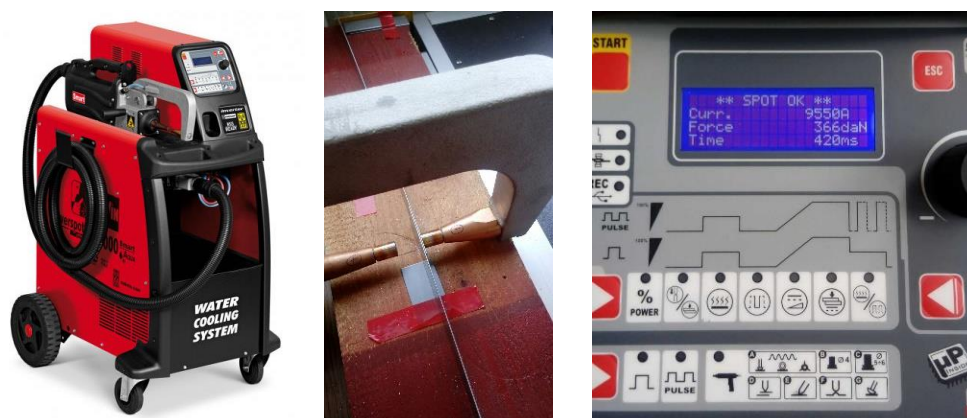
Welding equipment Inverspotter 14000 Smart Aqua
